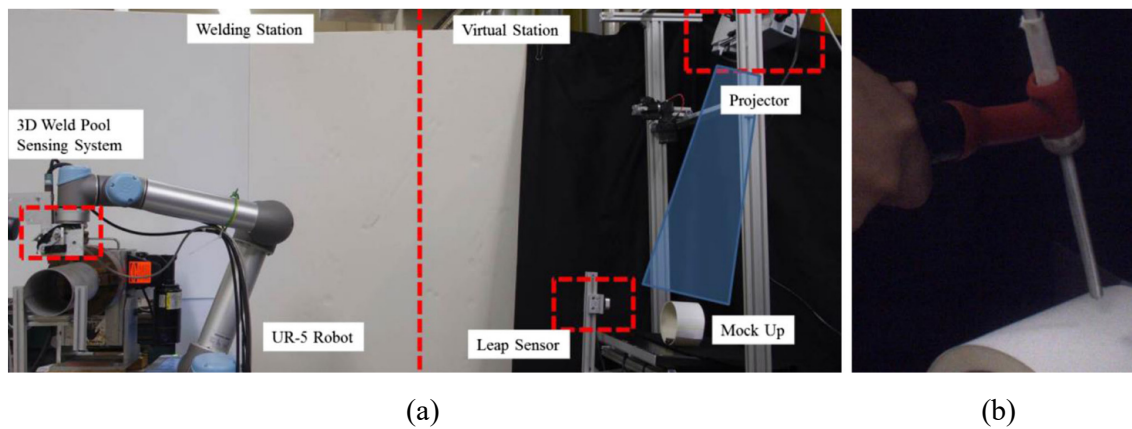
The projection-based MR remotely-controlled robotic welding system for transferring welder skills and human-level dynamics to the welding robot [123]. (a) Overview of the welding station and virtual station. (b) The replica of a welding torch used in the MR welding station.
